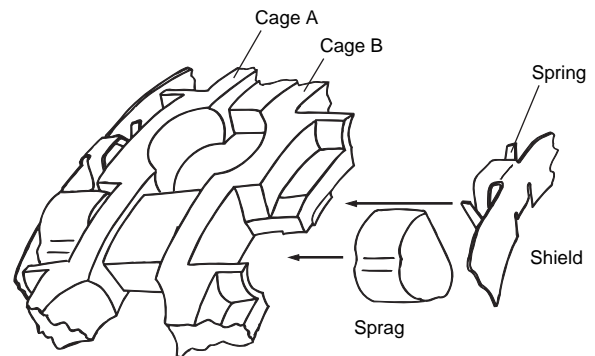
Internal structure of one-way clutch with built-in ball bearing WCB6205
